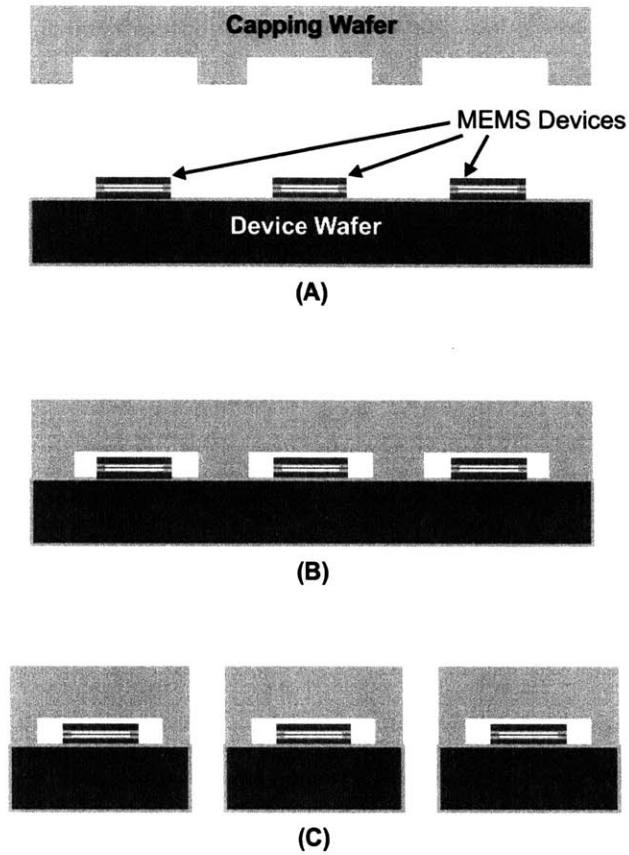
Schematic illustration of the wafer bonding vacuum packaging approach. (A) device wafer and capping wafer prior to bonding. (B) wafer stack after bonding. (C) individual chips after bonding and dicing.
